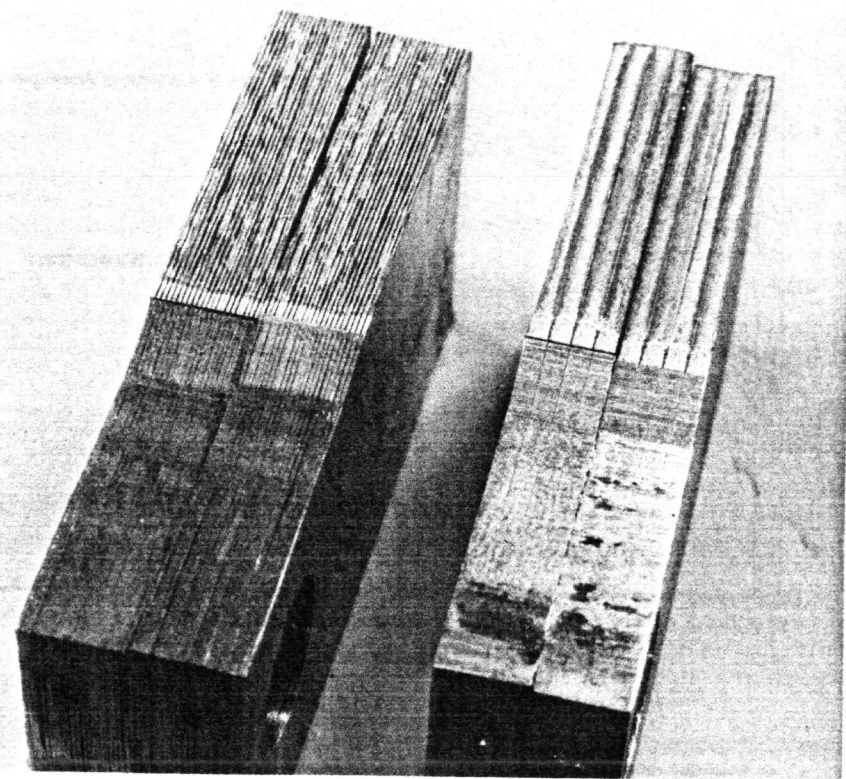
Fracture Surfaces of 22-Layer and 4-Layer 7075-T6 Laminates
